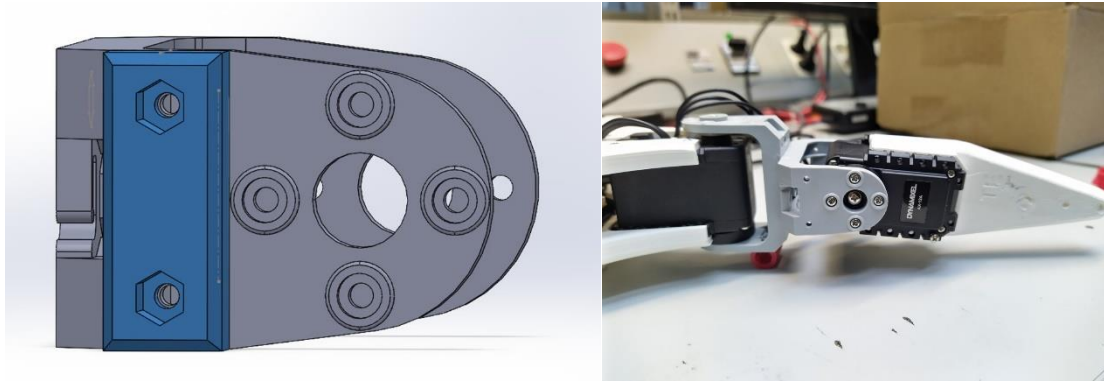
Tube and 3d printed pieces attached to the actuator connector.
